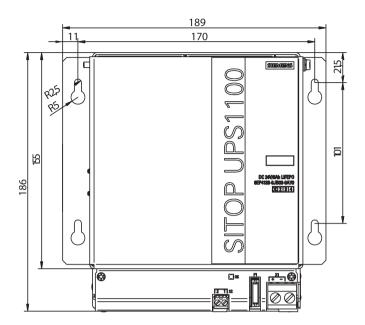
Dimension drawing 6EP4133-0JB00-0AY0
